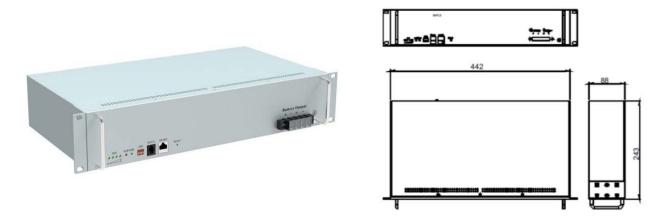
Appearance and Mechanical Drawing of U3C-20P-48V-A
